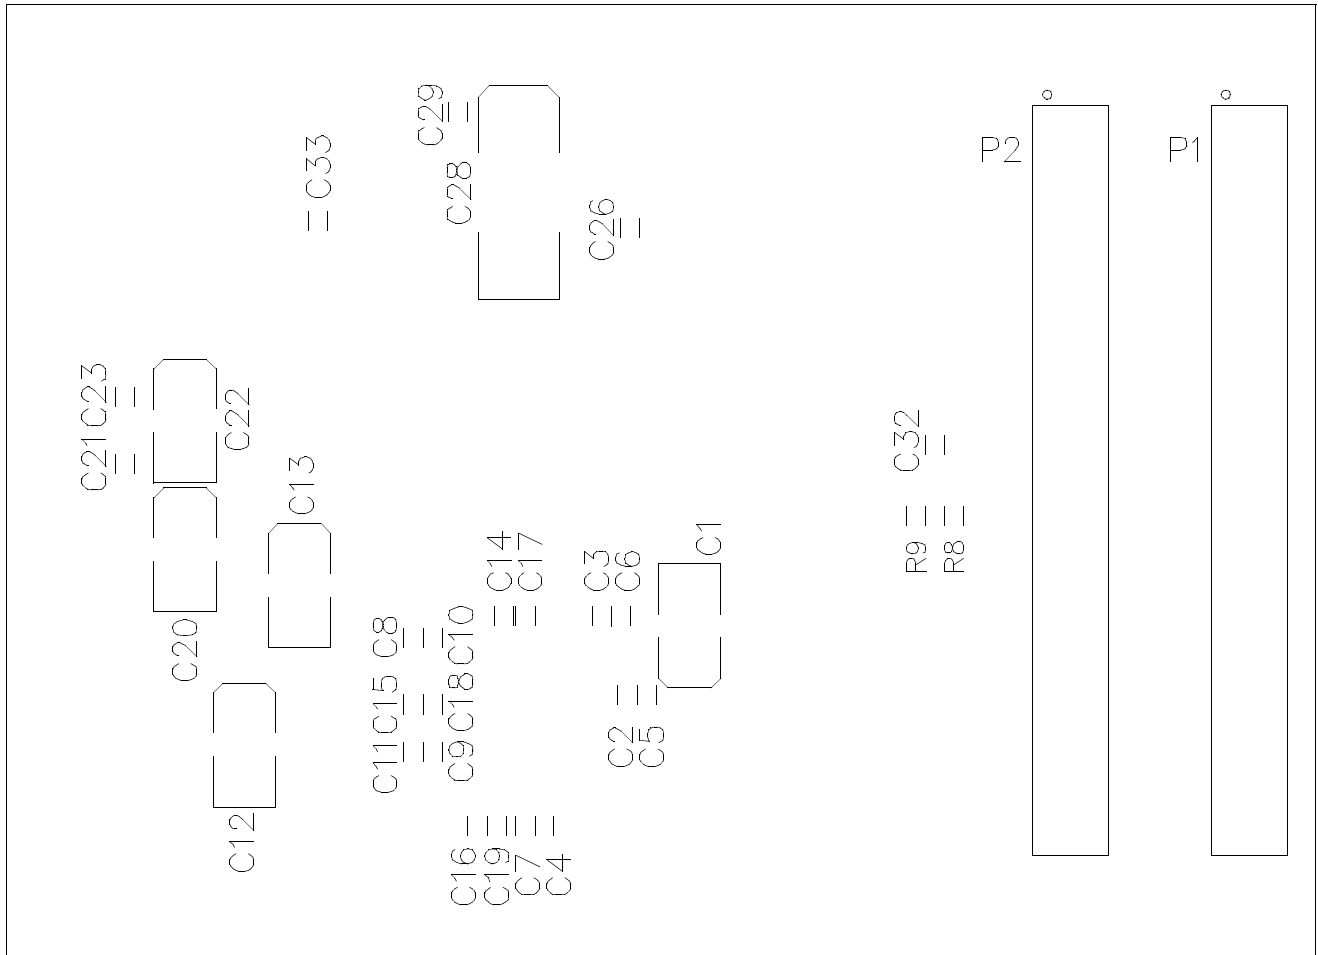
S5U13700B00C Board Layout (Bottom View)
